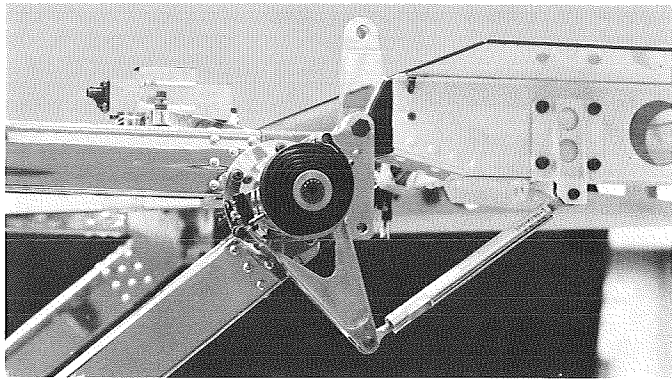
Deploy/damper mounted to outrigger in panel deployed position
